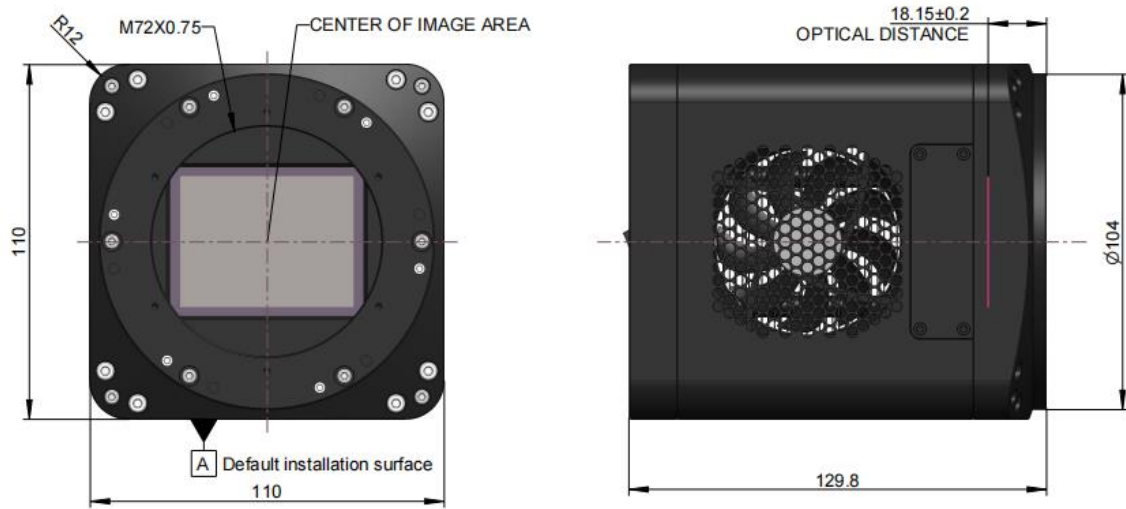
MaxCam- 811M/C-TE& MaxCam-411M/C-TE dimensions (mm)
